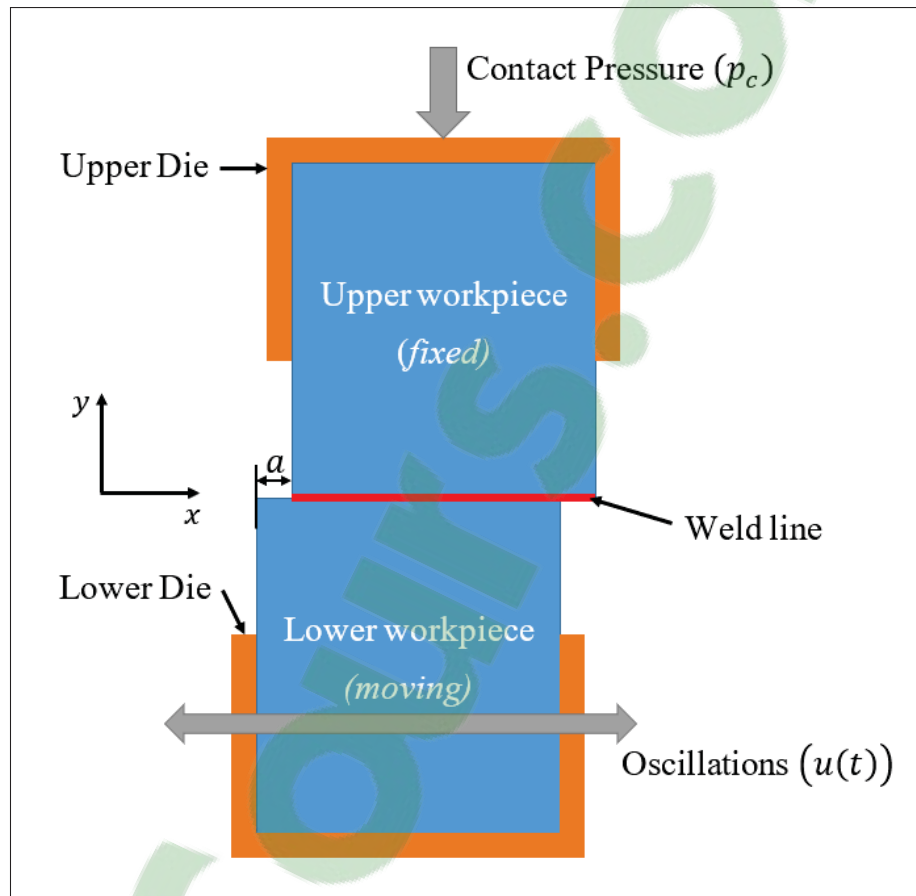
Vertical mounting setup of the linear friction welding
